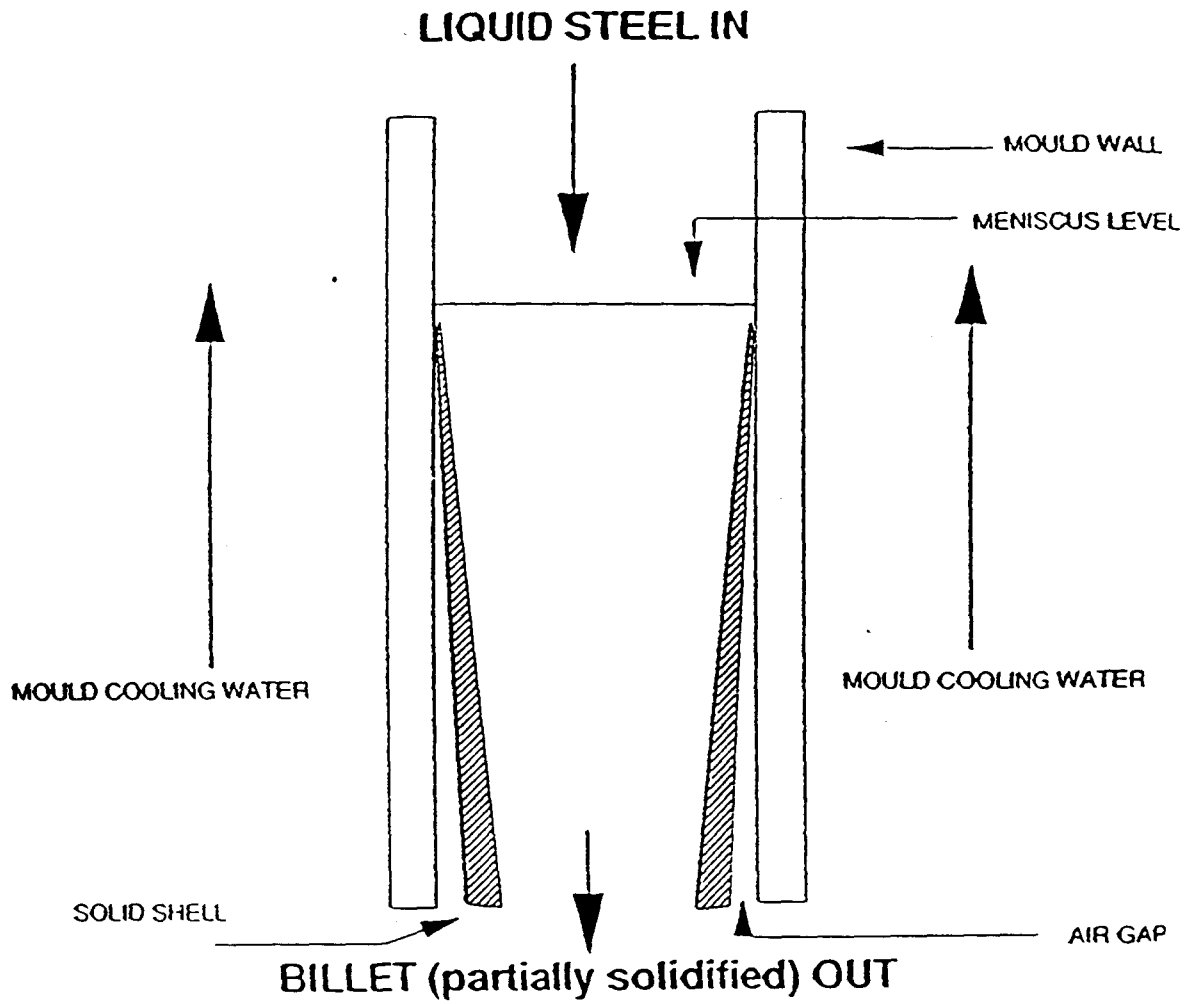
Schematic diagram of a casting set-up for the continuous casting of steel billets [2].
